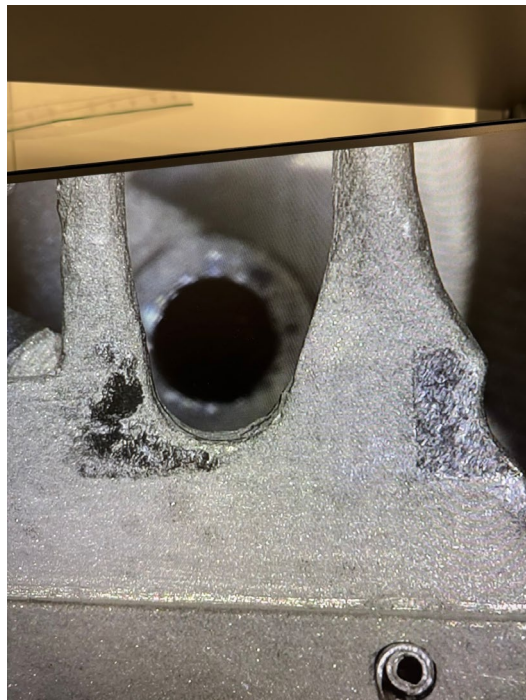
Observed material wear on the contact surface of the aluminum mount after mechanical testing.
